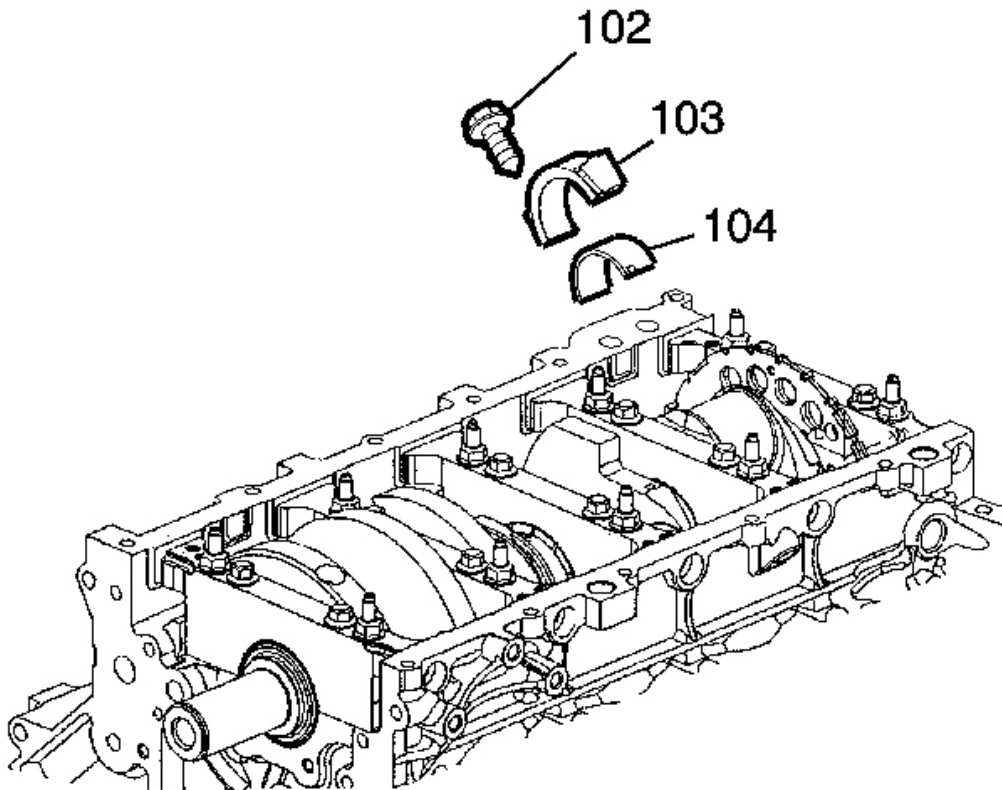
View Of Connecting Rod Bolt, Cap & Bearing
